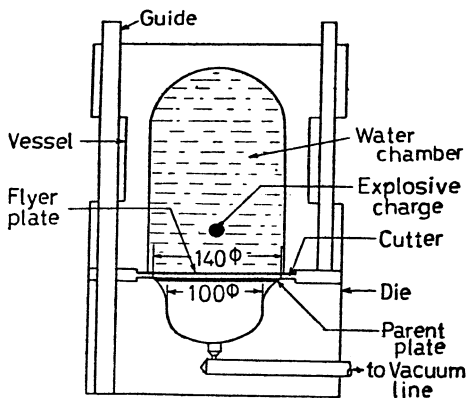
Equipment of explosive weld-forming process by shock wave in water
